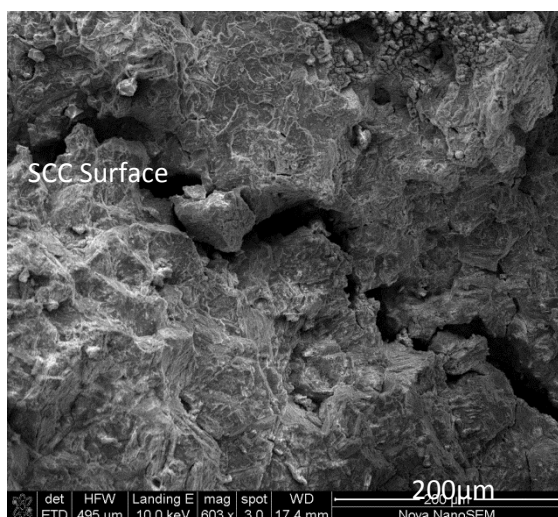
Fracture surface of 560°C temper WOL specimen, showing crack path across the sample displaying intergranular SCC and corrosion product formed on surface of the fracture path
